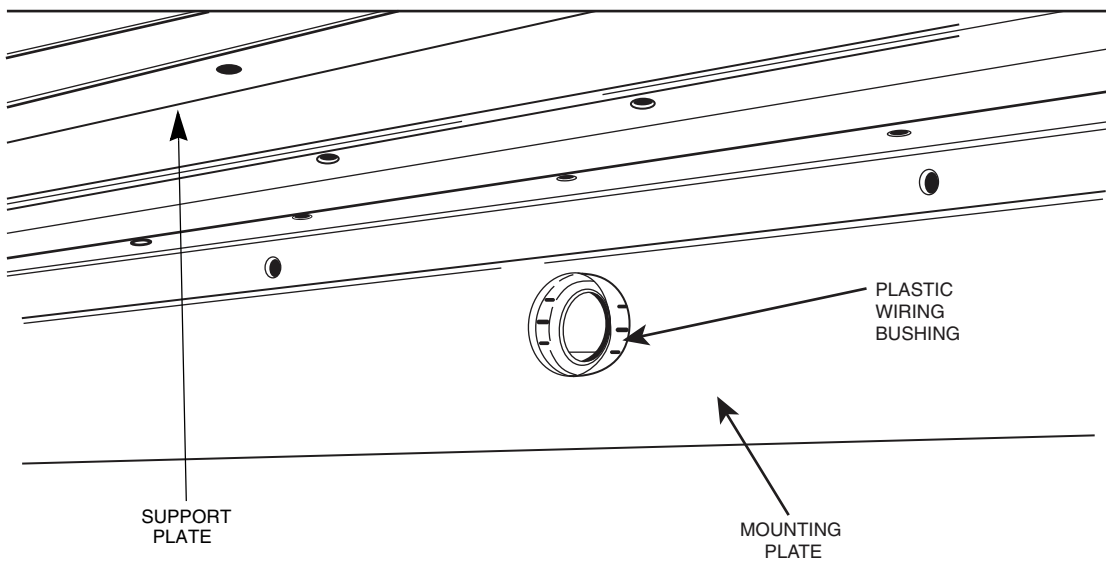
Plastic Bushing into Hole Mounting Plate
